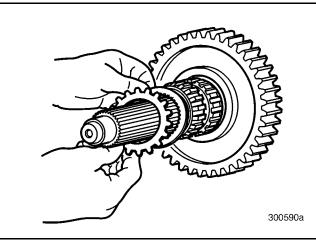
Installing Internal- and External-Toothed Thrust Washers
